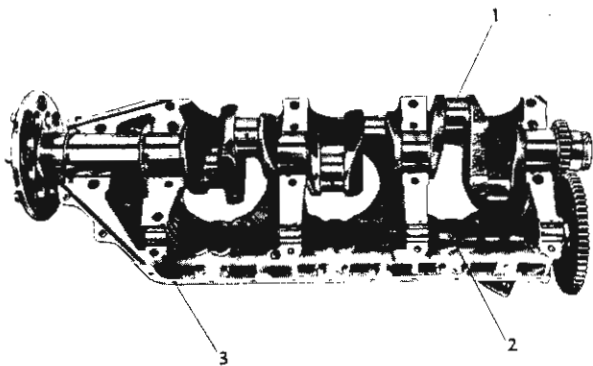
Camshaft and Crankshaft Installed in Crankcase
